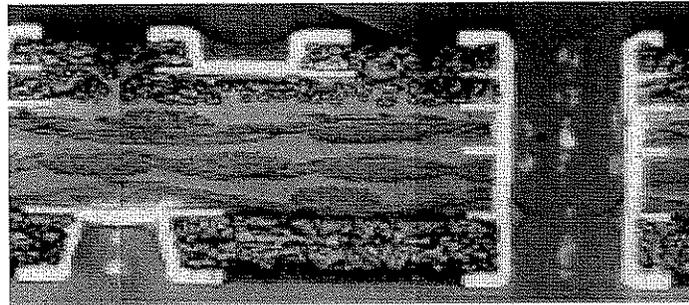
Cross-sectional view of HDI structure on a multilayer core.
